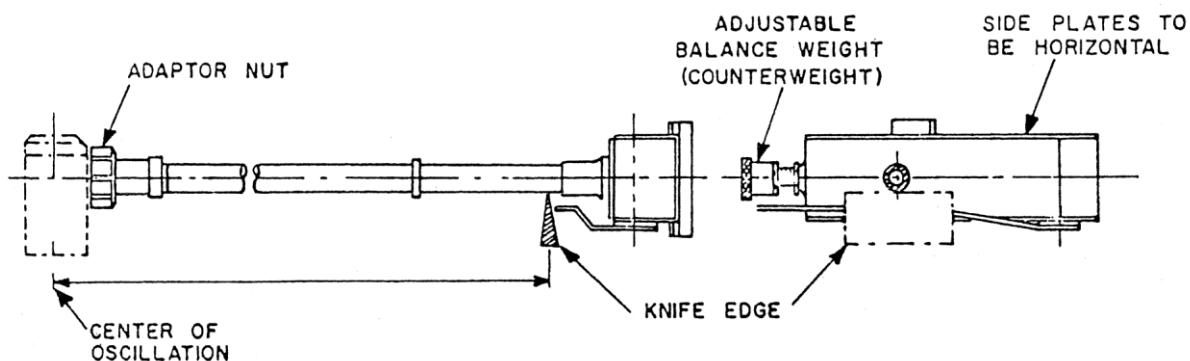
PENDULAM ASSEMBLY SHOWING LOCATION OF THE POINT OF BALANCE
